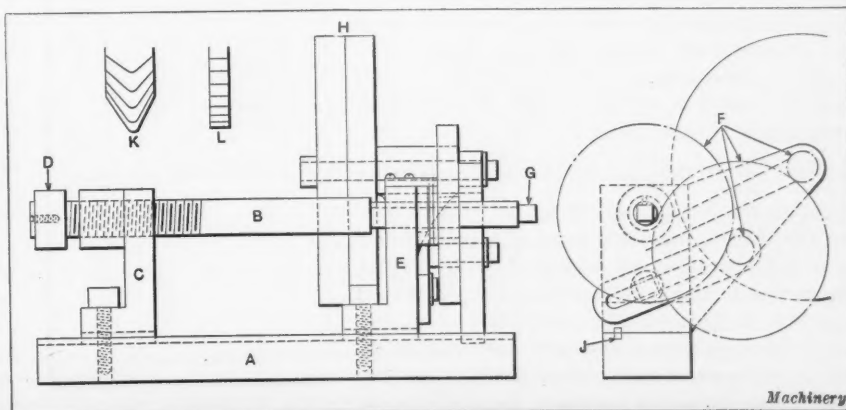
Special Machine or Attachment used for milling Threads on Gages
